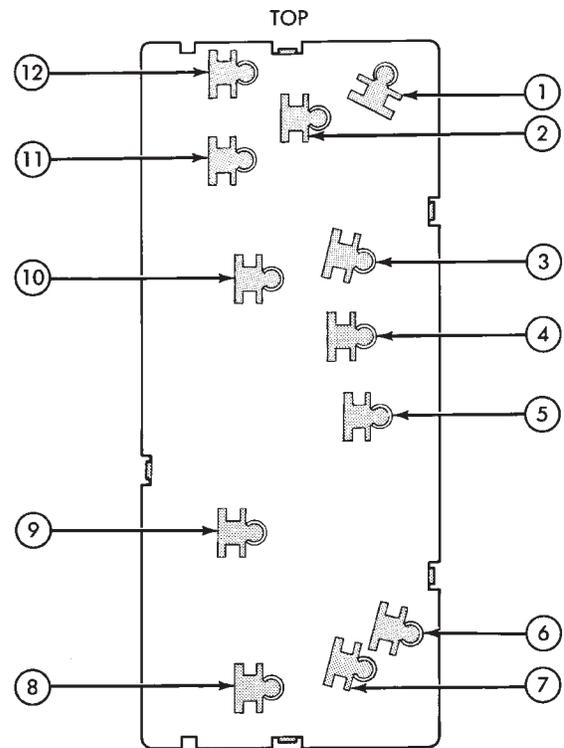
Power Seat Switch Connector-AG & AJ Bodies
